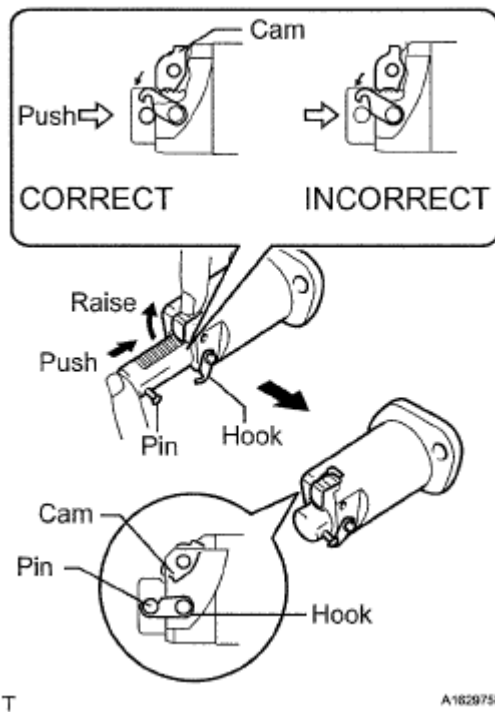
Installing No. 1 Chain Tensioner Assembly
